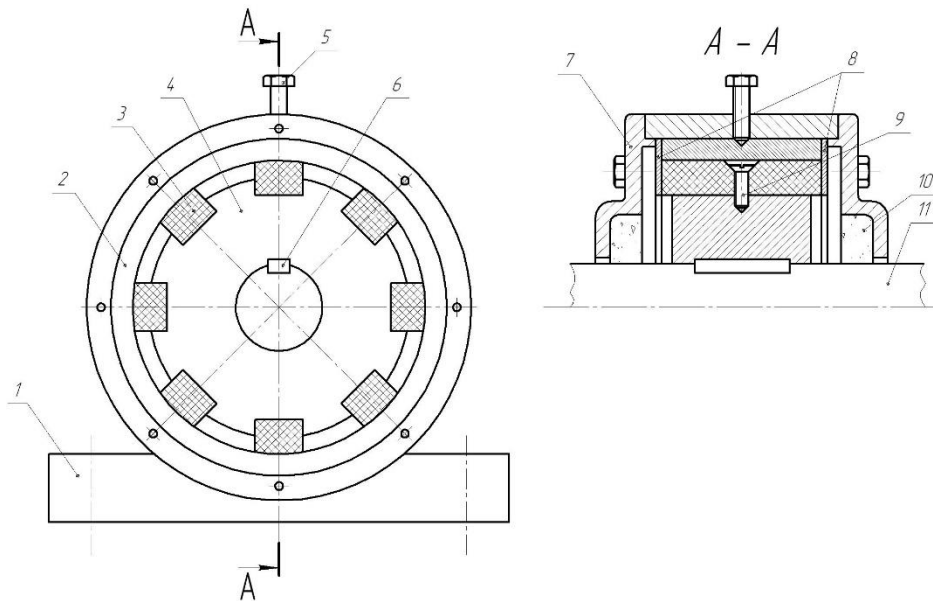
The scheme of a sliding bearing with type-setting inserts from thermoplastic plastics.
